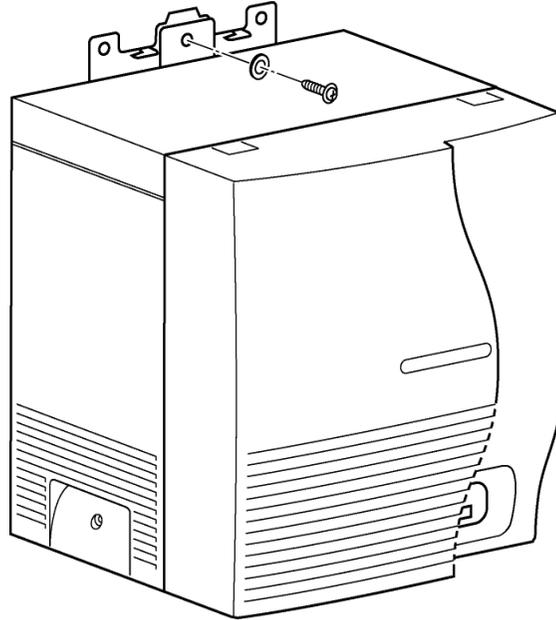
Attaching the Wall Mount Bracket with Spacer
